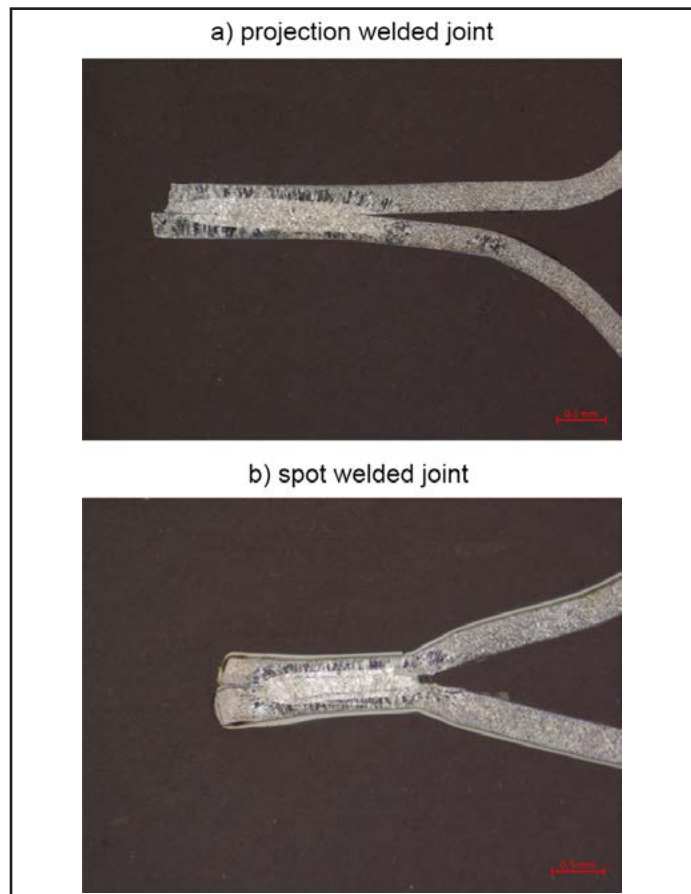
Macrostructures of a) projection and b) spot welded joints
